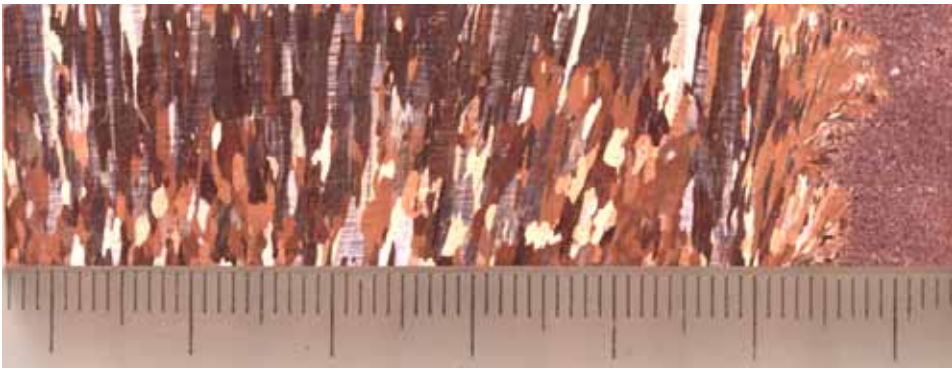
Macrograph of the longitudinal section of an EB weld. Top of the weld is on the left side and bottom on the right side. Tube material can be seen on the right side. The very large longitudinal grain size of the weld can be clearly seen. The scale is a ruler with 1 mm divisions.
